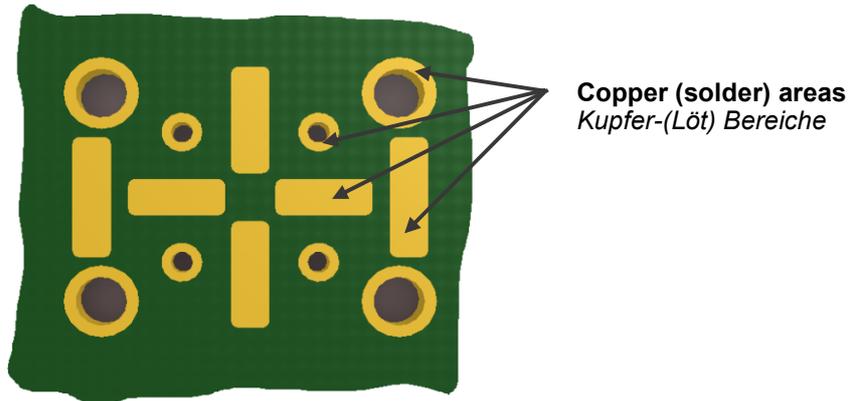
PCB Layout for MATE-AX header 2304168
